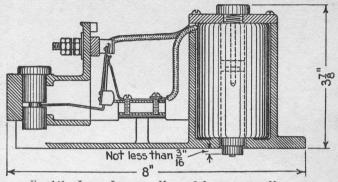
Lever Lock for Model 2 Interlocking Machine
